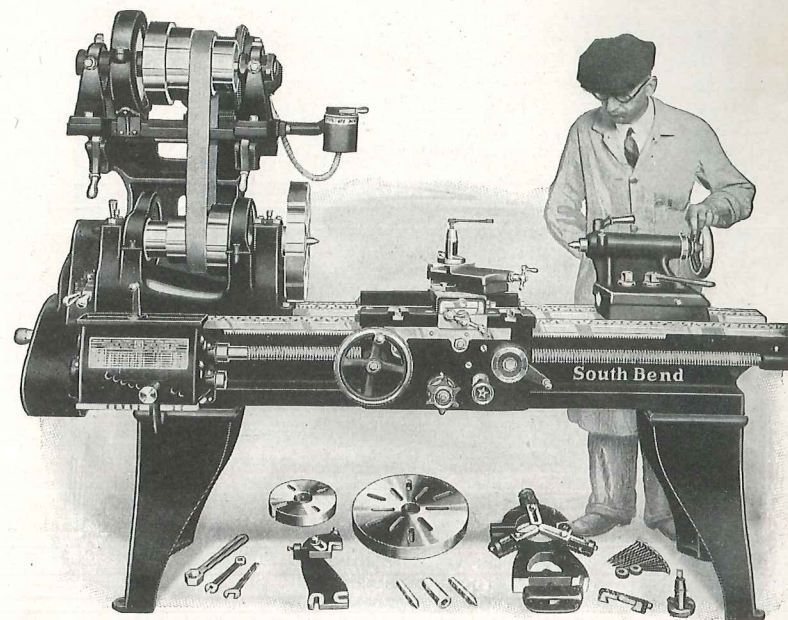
9-inch "Workshop" Lathe with Single Step Triple V-Belt Drive
